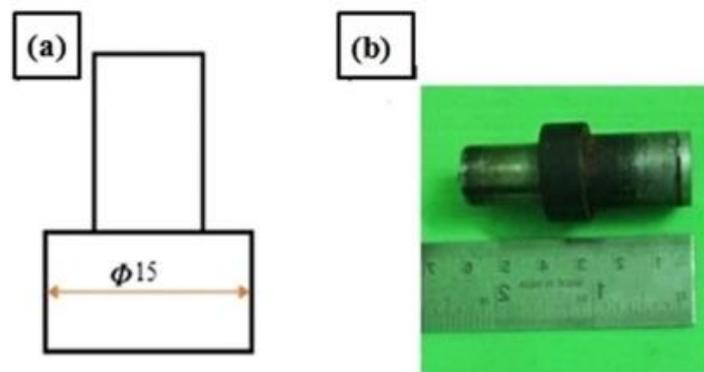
(a) Schematic diagram of pin-less FSP tool (b) Actual image of pin-less FSP tool.
